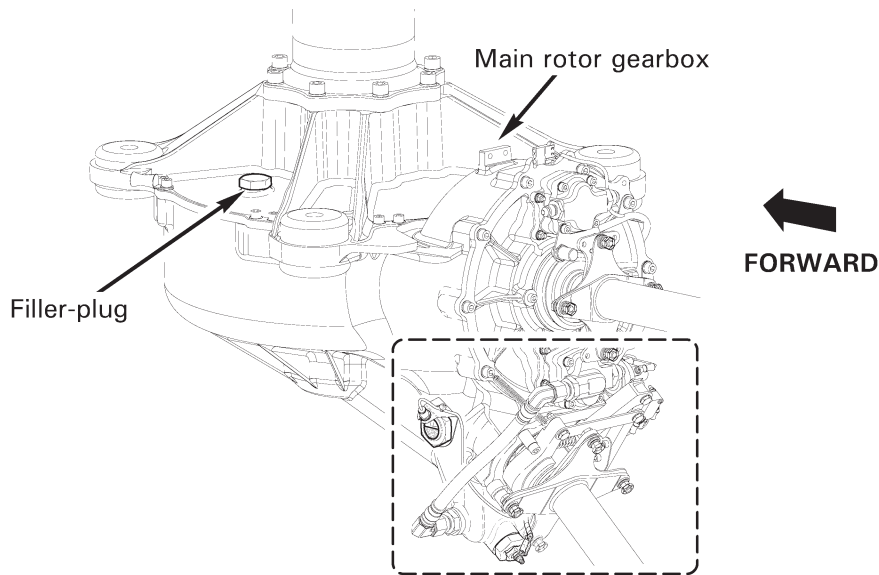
MAIN ROTOR GEARBOX SERVICING
